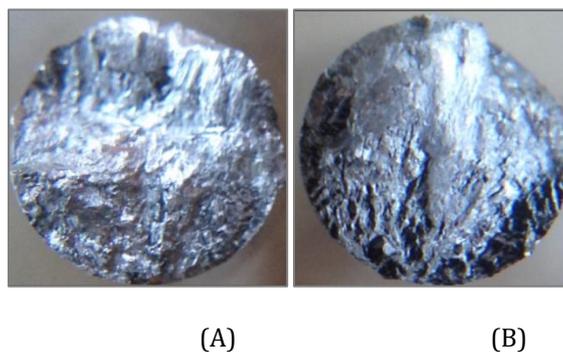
(2117-T4) Aluminum A-Surface fracture for (Reversed bending) fatigue, B-Surface fracture for (bending with torsion) fatigue
